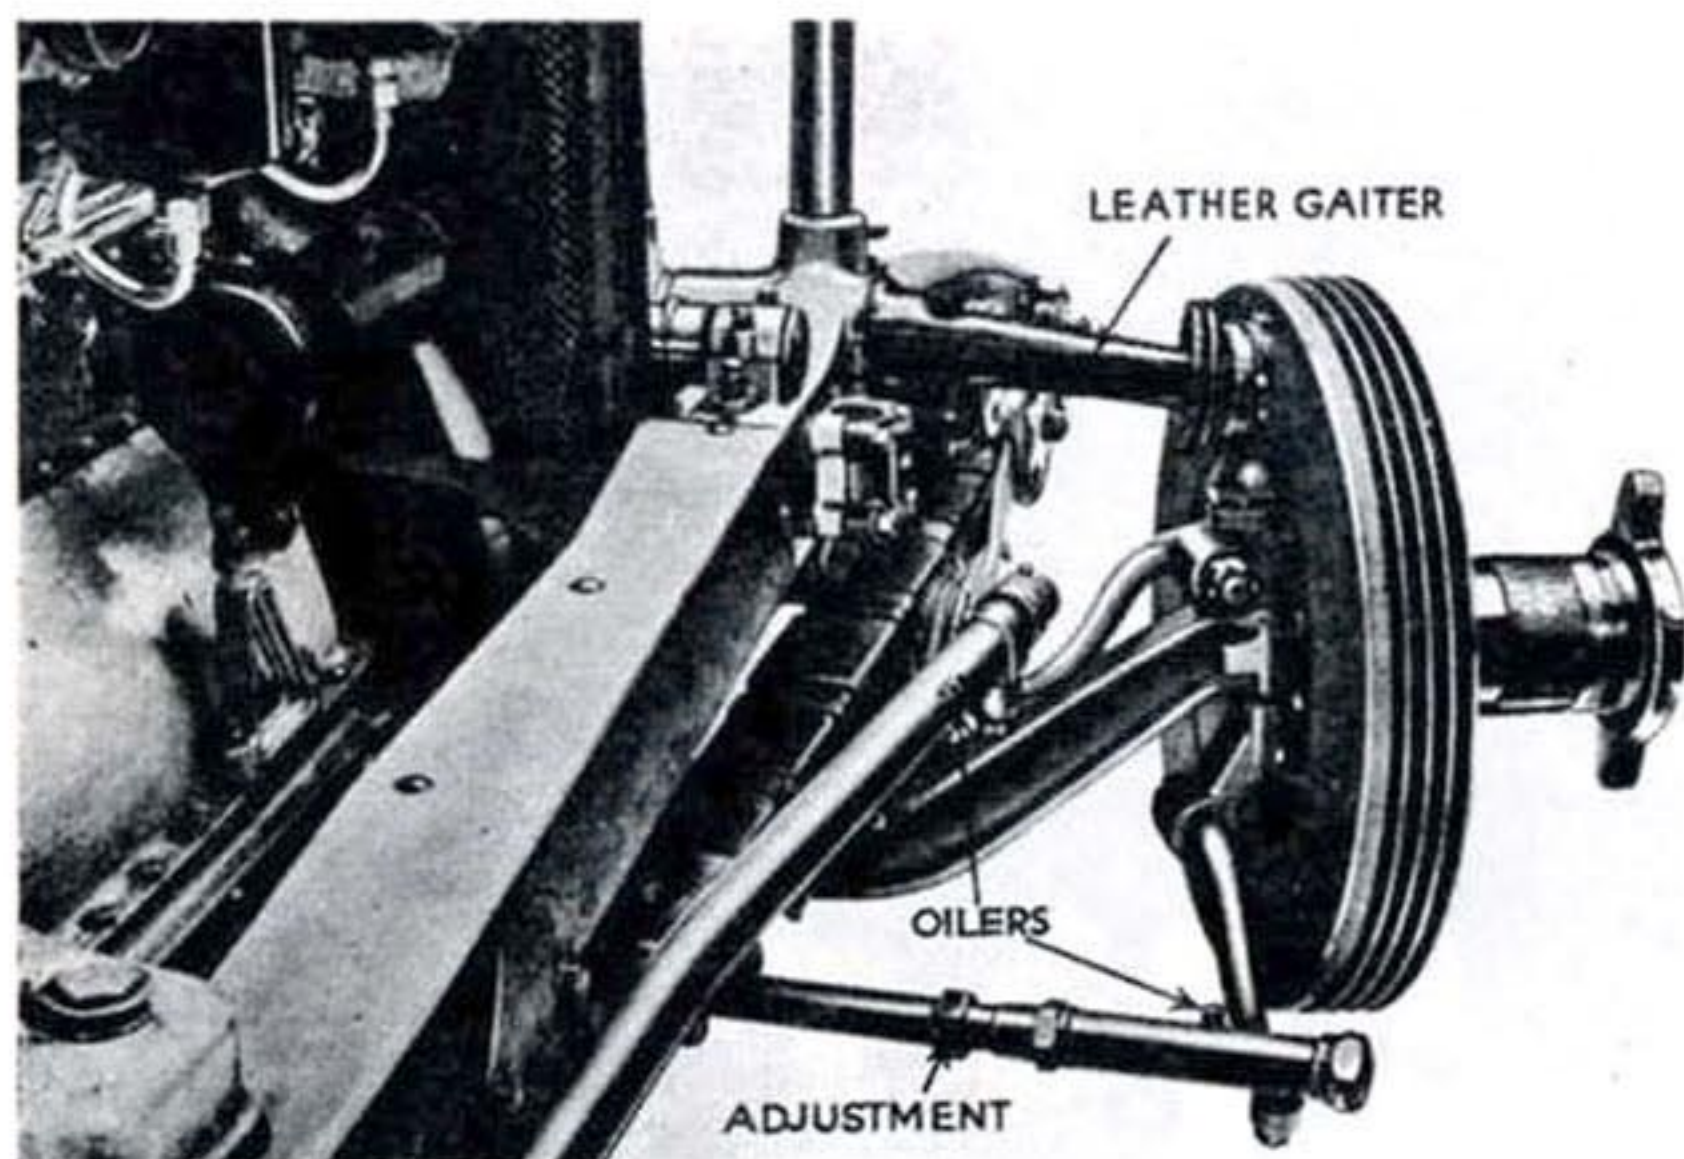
FRONT AXLE WITH WHEEL REMOVED SHOWING ADJUSTMENT POINT OF TRACK ROD AND OILING NIPPLES.
